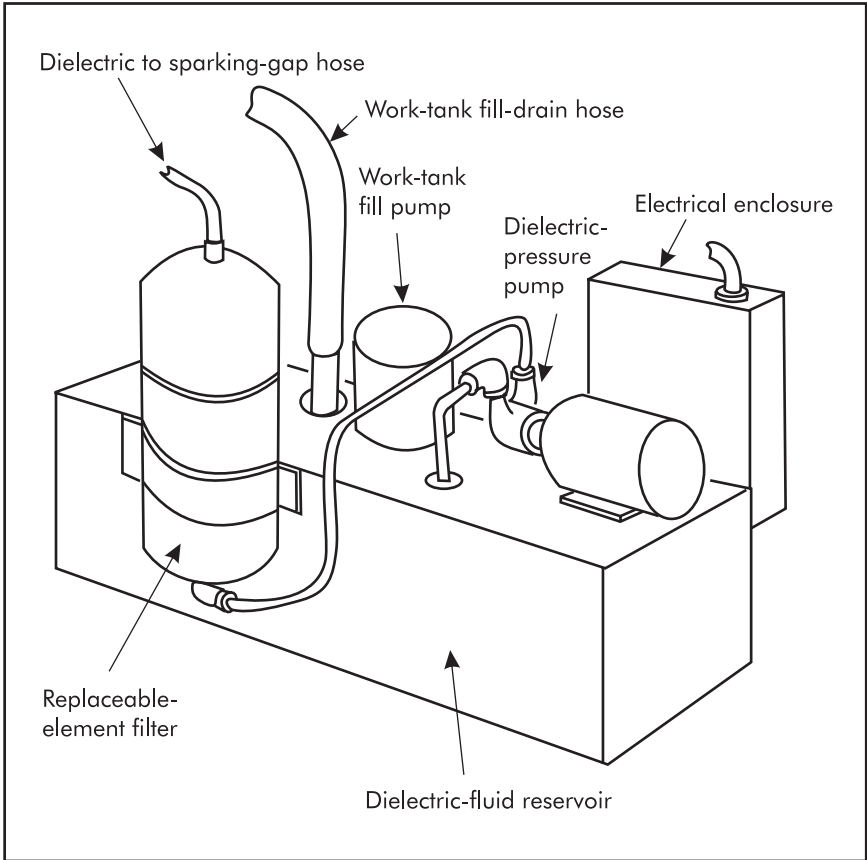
Dielectric-fluid filter-and-storage assembly.
